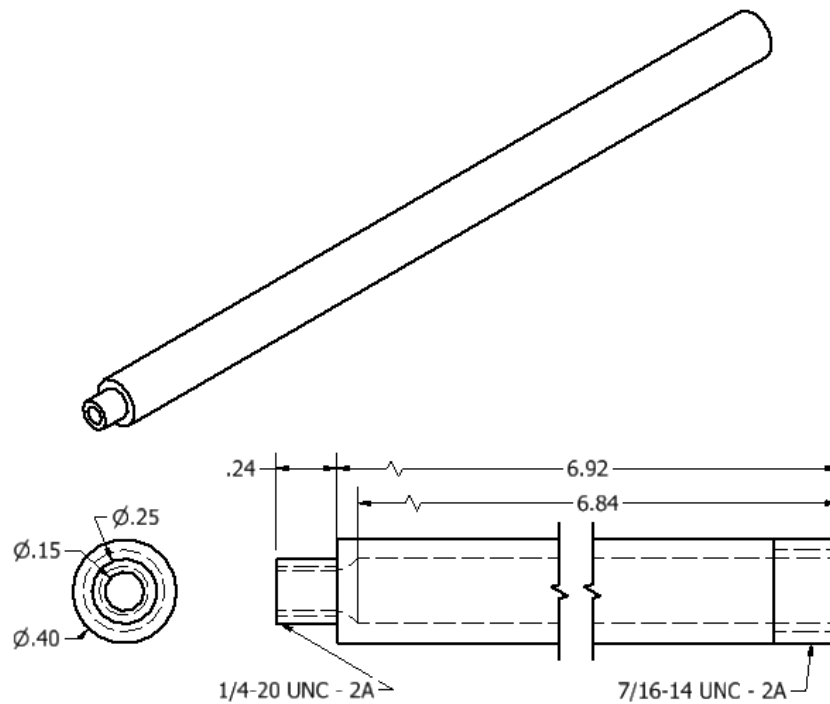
Connector rod for Mark 1 grabber. Dimensions in inches.
